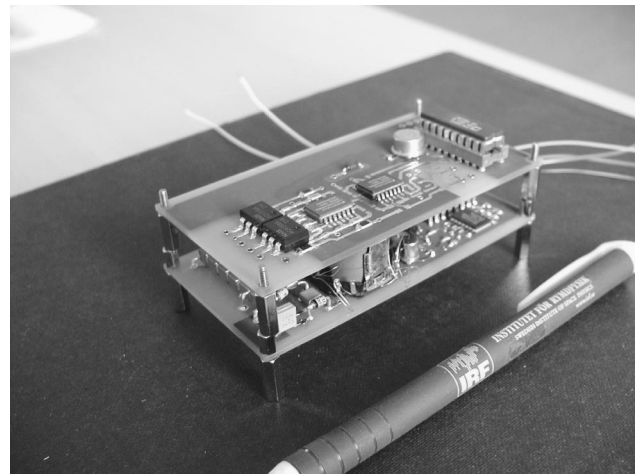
Prototype high voltage electronics mounted on two boards. In future versions, the two boards will be combined in one single board using two-side mounting.
